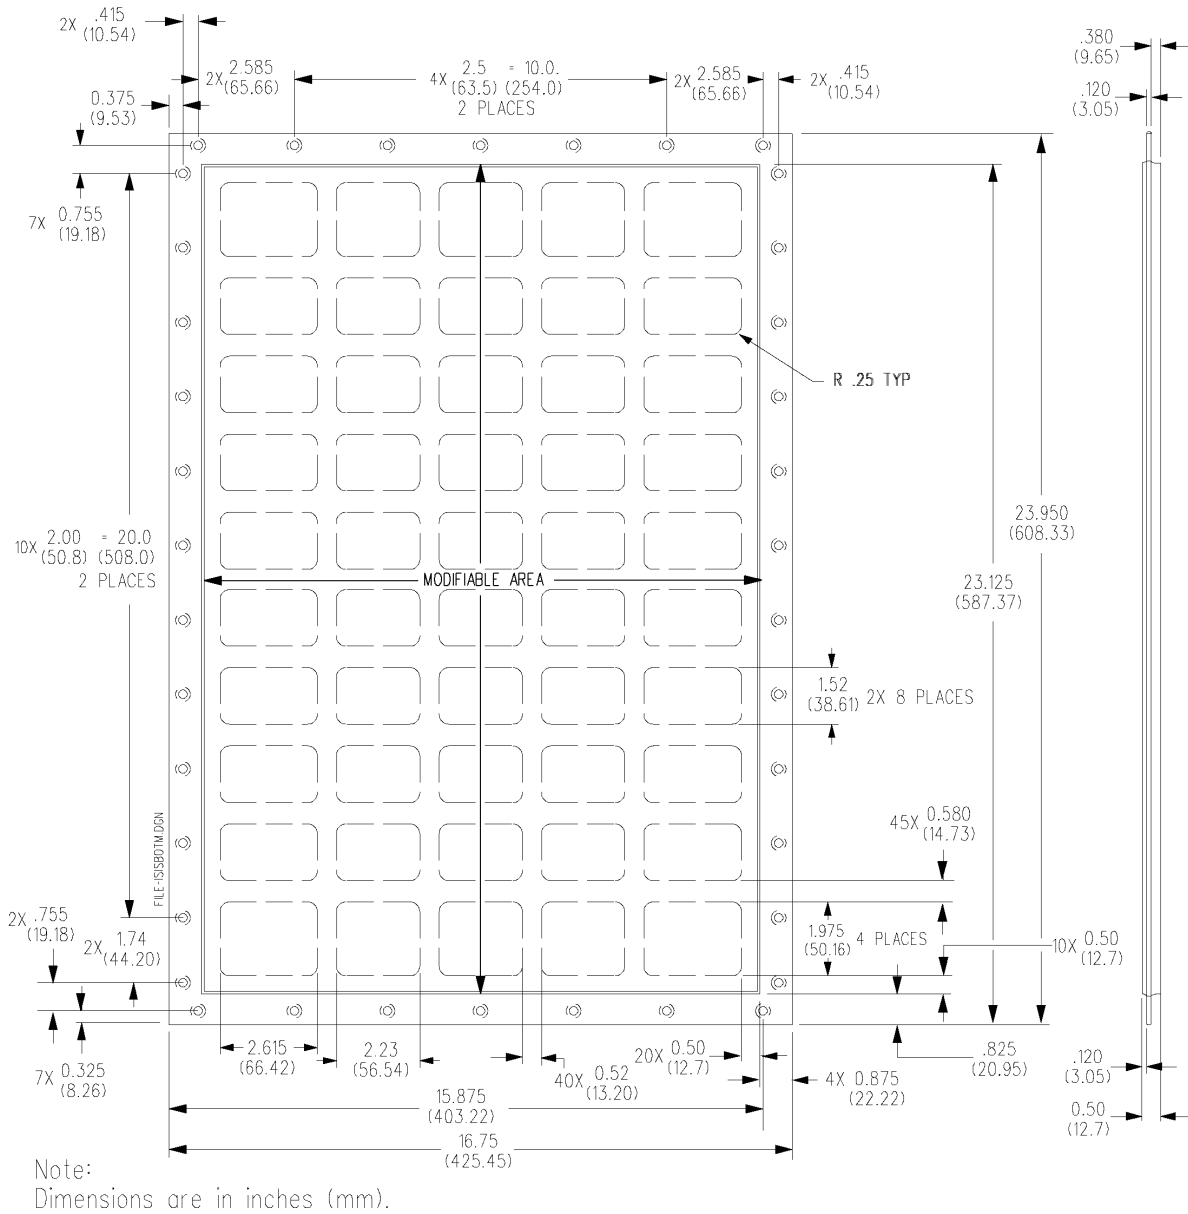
ISIS DRAWER BOTTOM PLATE
